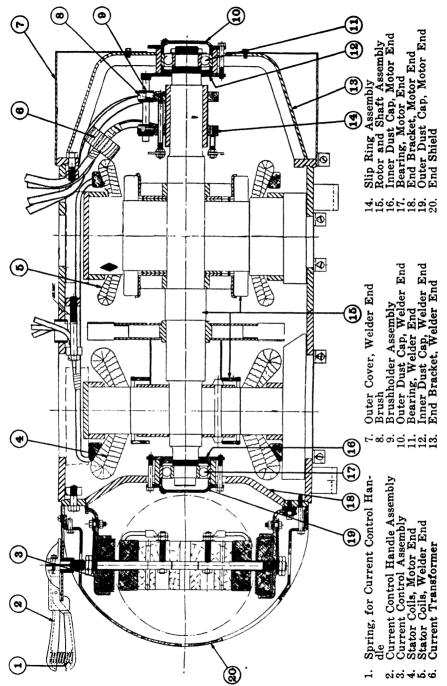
A complete A.C. generator type arc welder, 180 cycles, 200 to 600 amp. capacity
